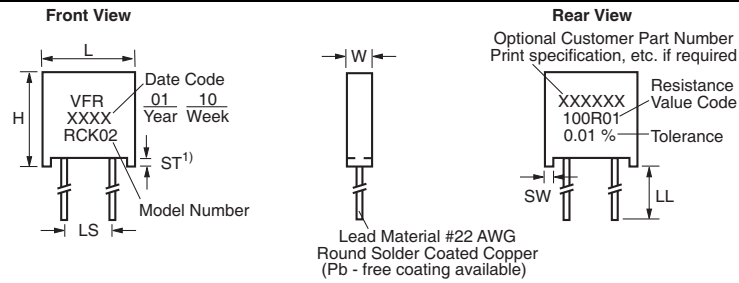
STANDARD IMPRINTING AND DIMENSIONS
